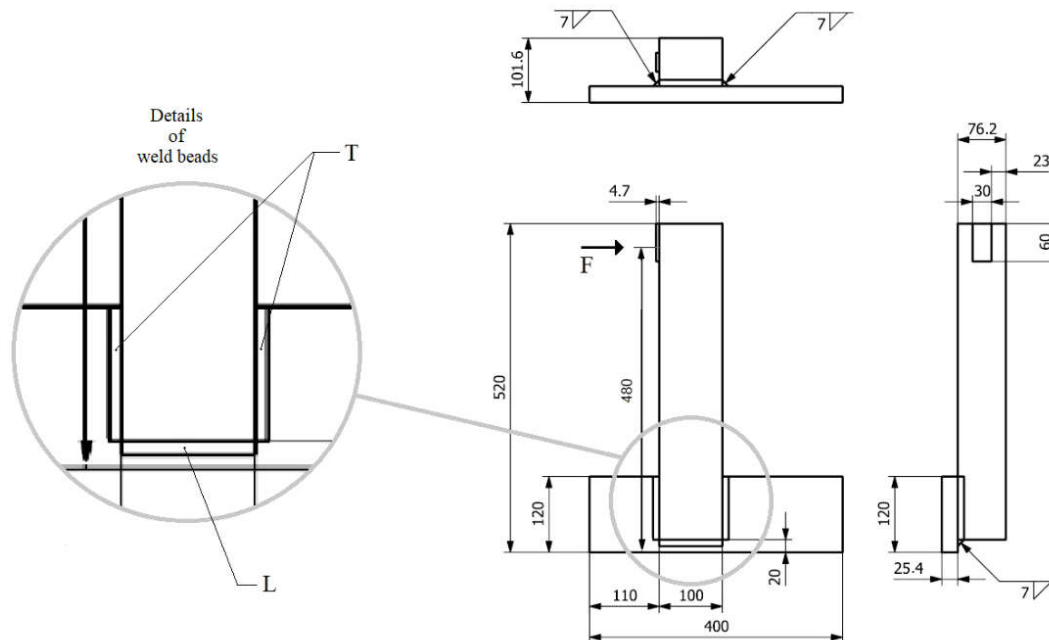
Weldments with beads “transversal to the load” (indicated with “T”) and in “C”, which additionally has a weld bead in the direction of loading (indicated with “L”)
